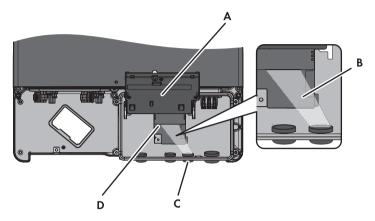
Mounting position and cable route in the inverter with the lower enclosure lid open and the display flipped up
